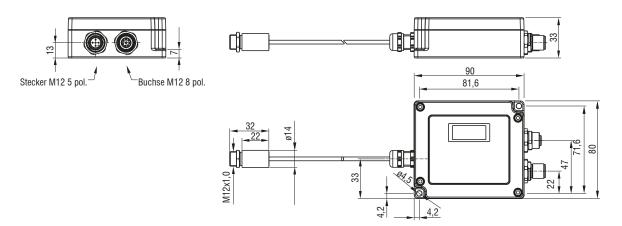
thermoMETER UC, dimensions in mm (inches, rounded off)
